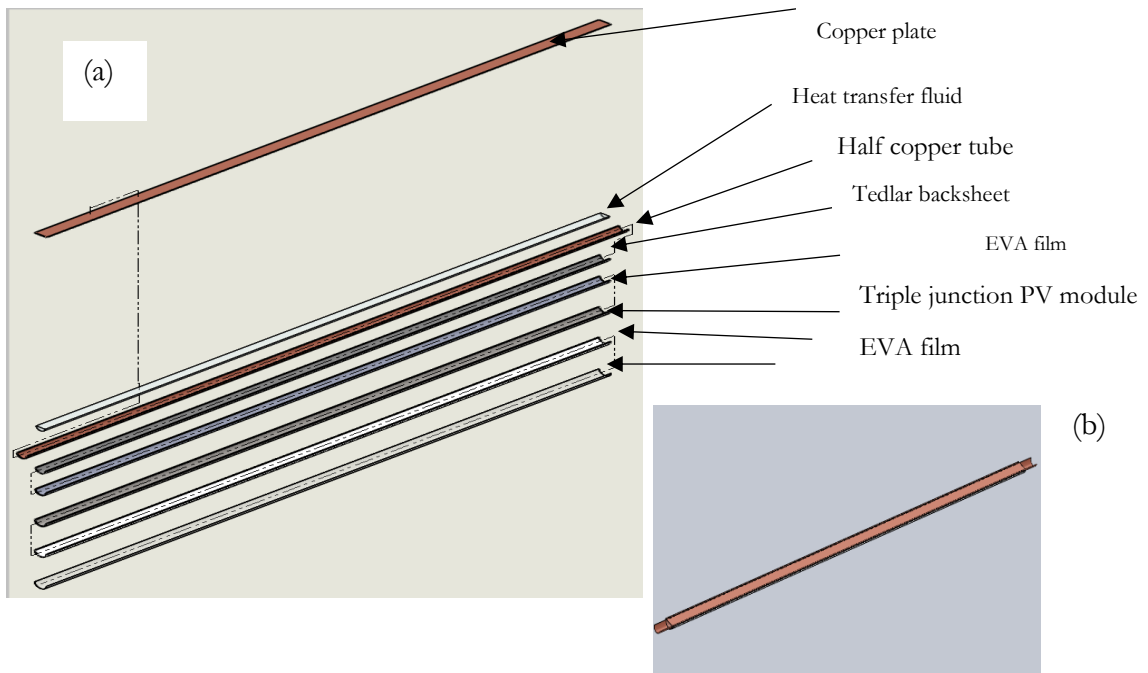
(a)An exploded view of the parabolic trough mirror and (b) the assembly view of the subsystem
